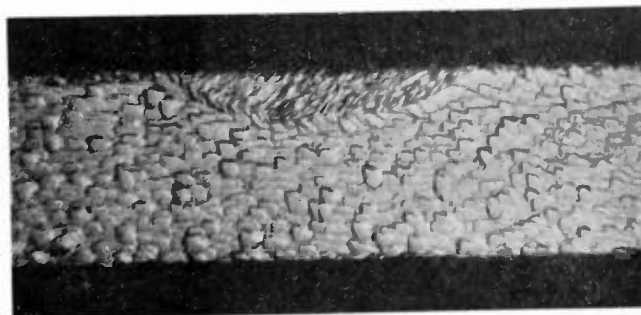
Cross section of CT-cut plate with lead soldered on one side.
